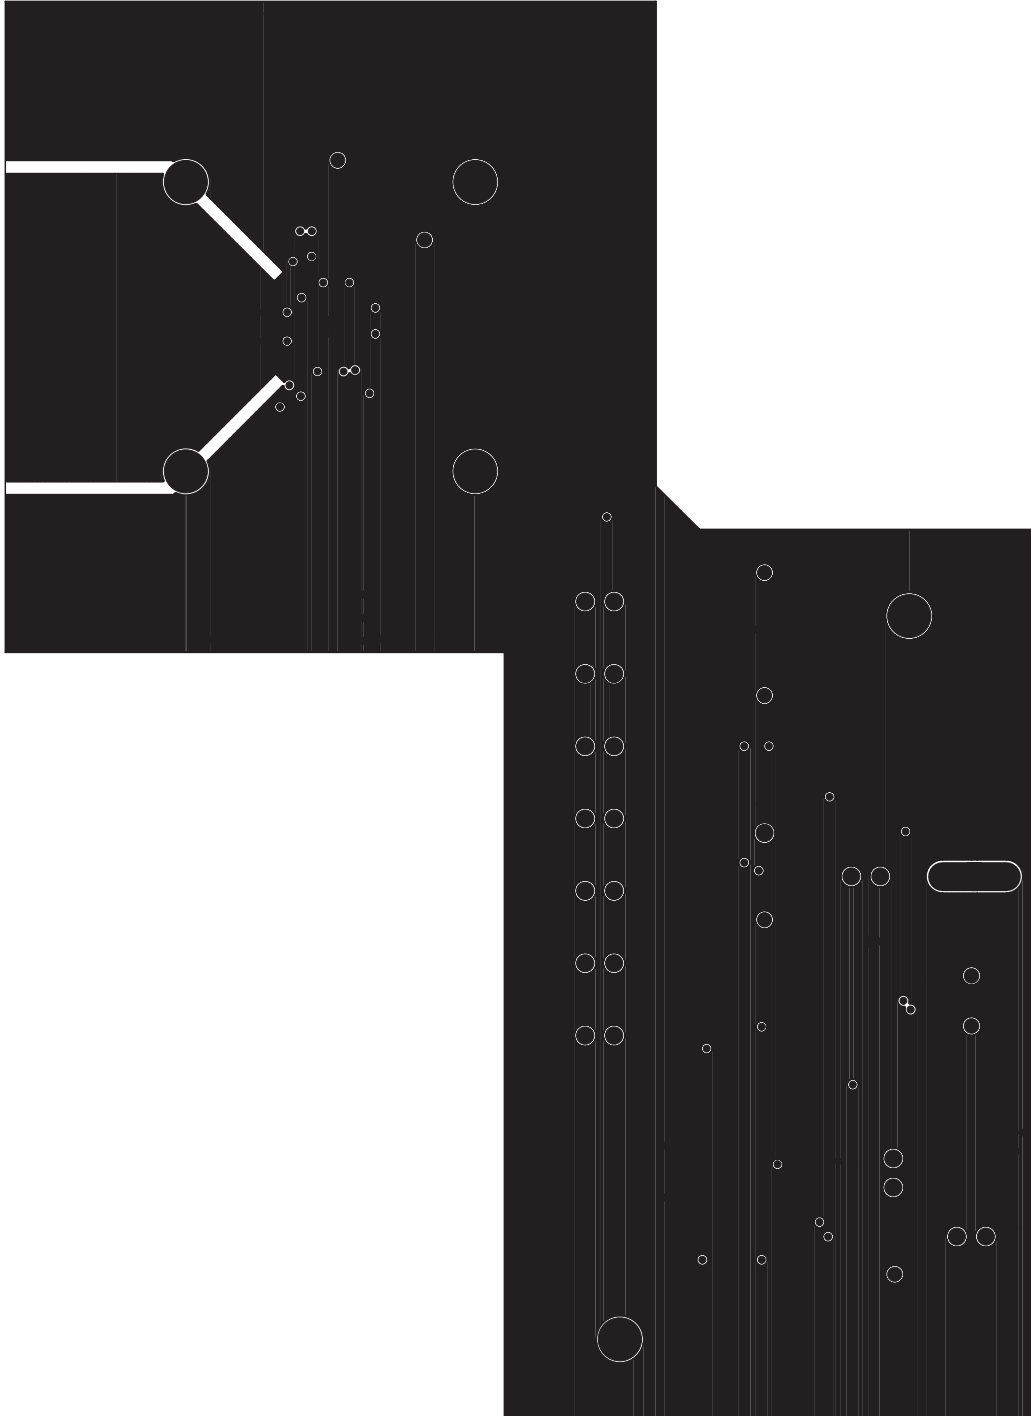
MAX3799 EV Kit PCB Layout—Ground Plane
